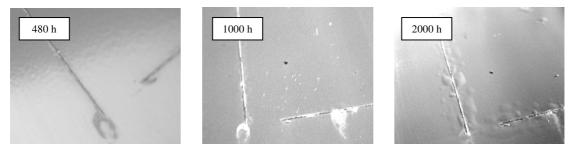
Spot welding panels of Sample 16 – observation by 480h, 1000h, 2000h
